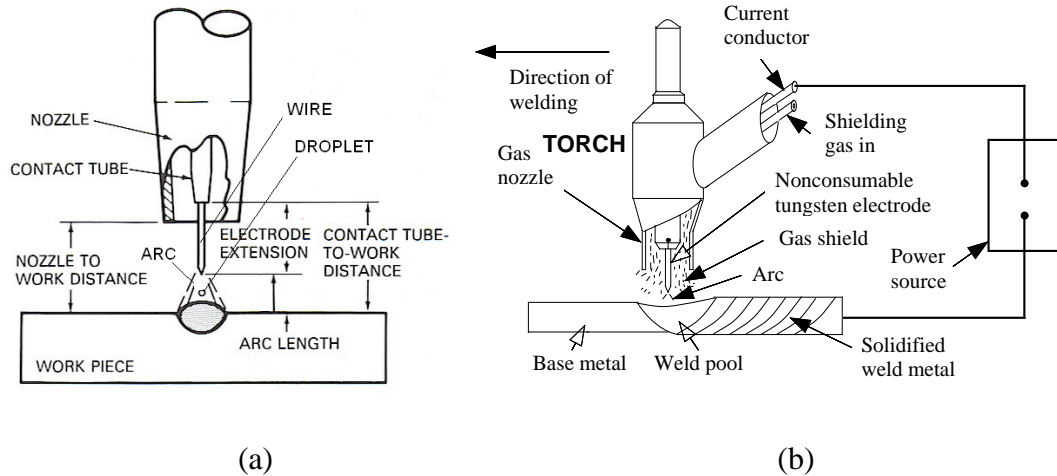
Illustration of GTAW and GMAW processes and weld penetration
